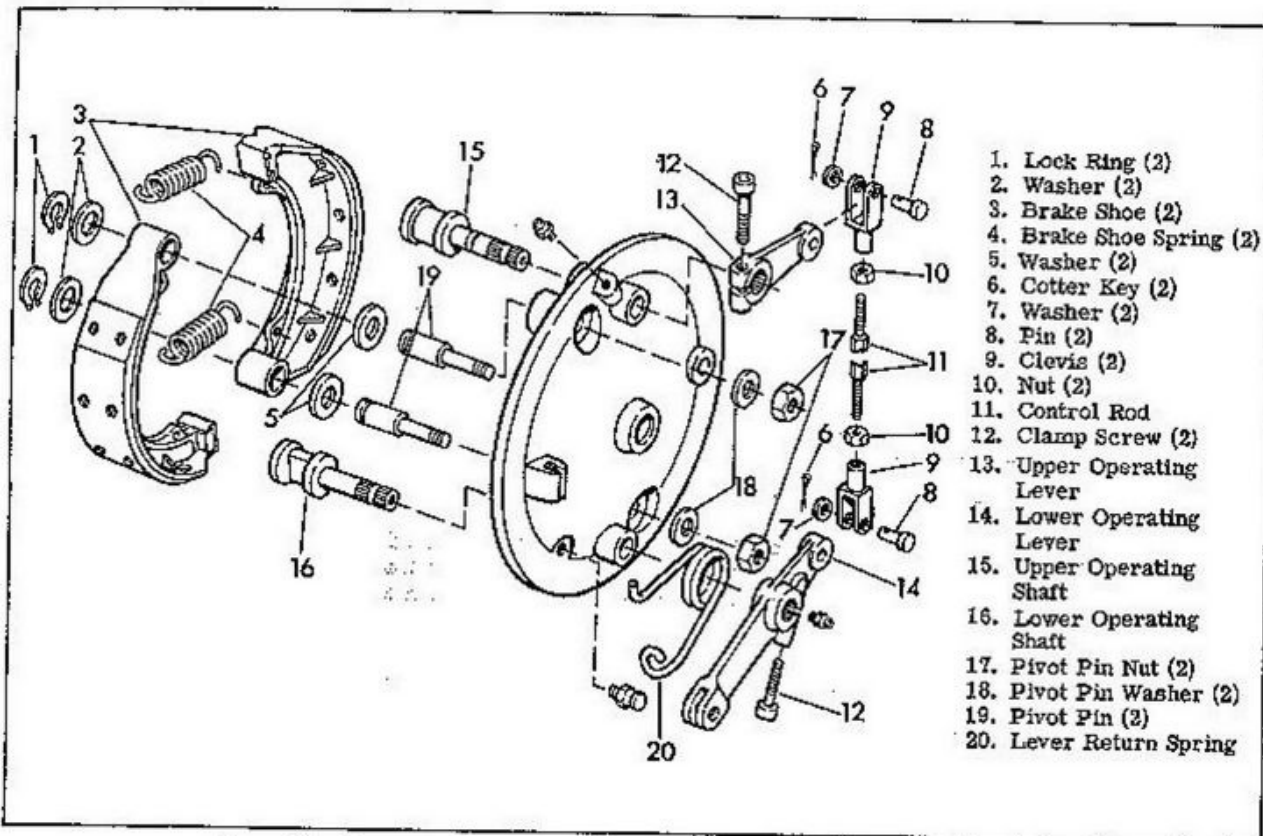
G-33A. Front Brake (1970-71, 1973 & Later "SS") - Exploded View
